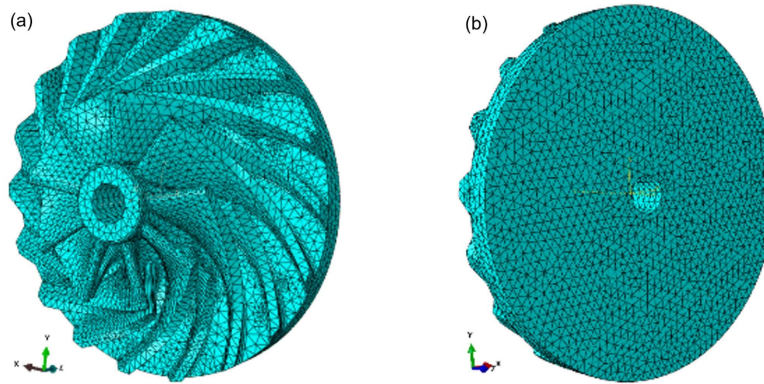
(a) FEM model of compressor impeller disc: blade side view and (b) disc side view
